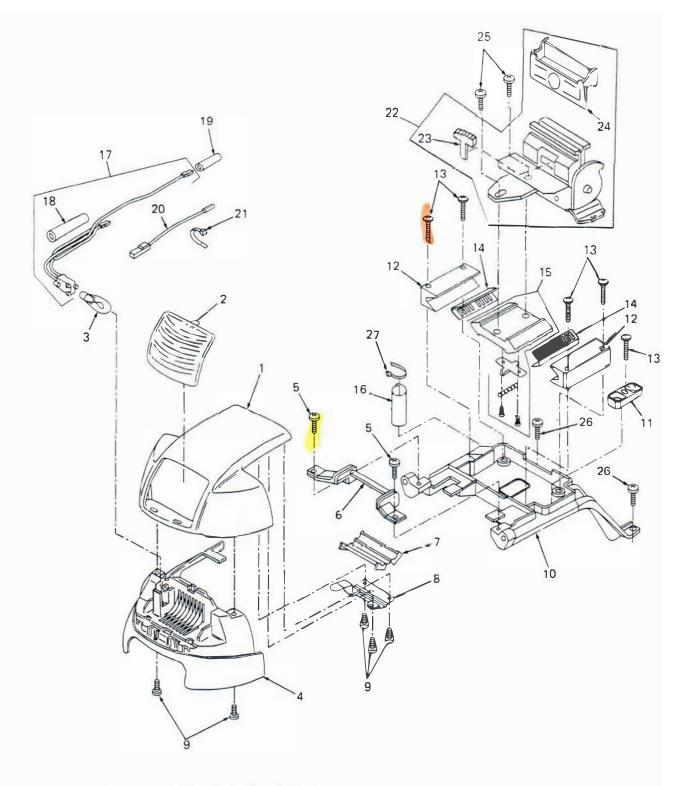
Headlight Cap/Slide Bracket/Handle Pivot Spring Assembly
